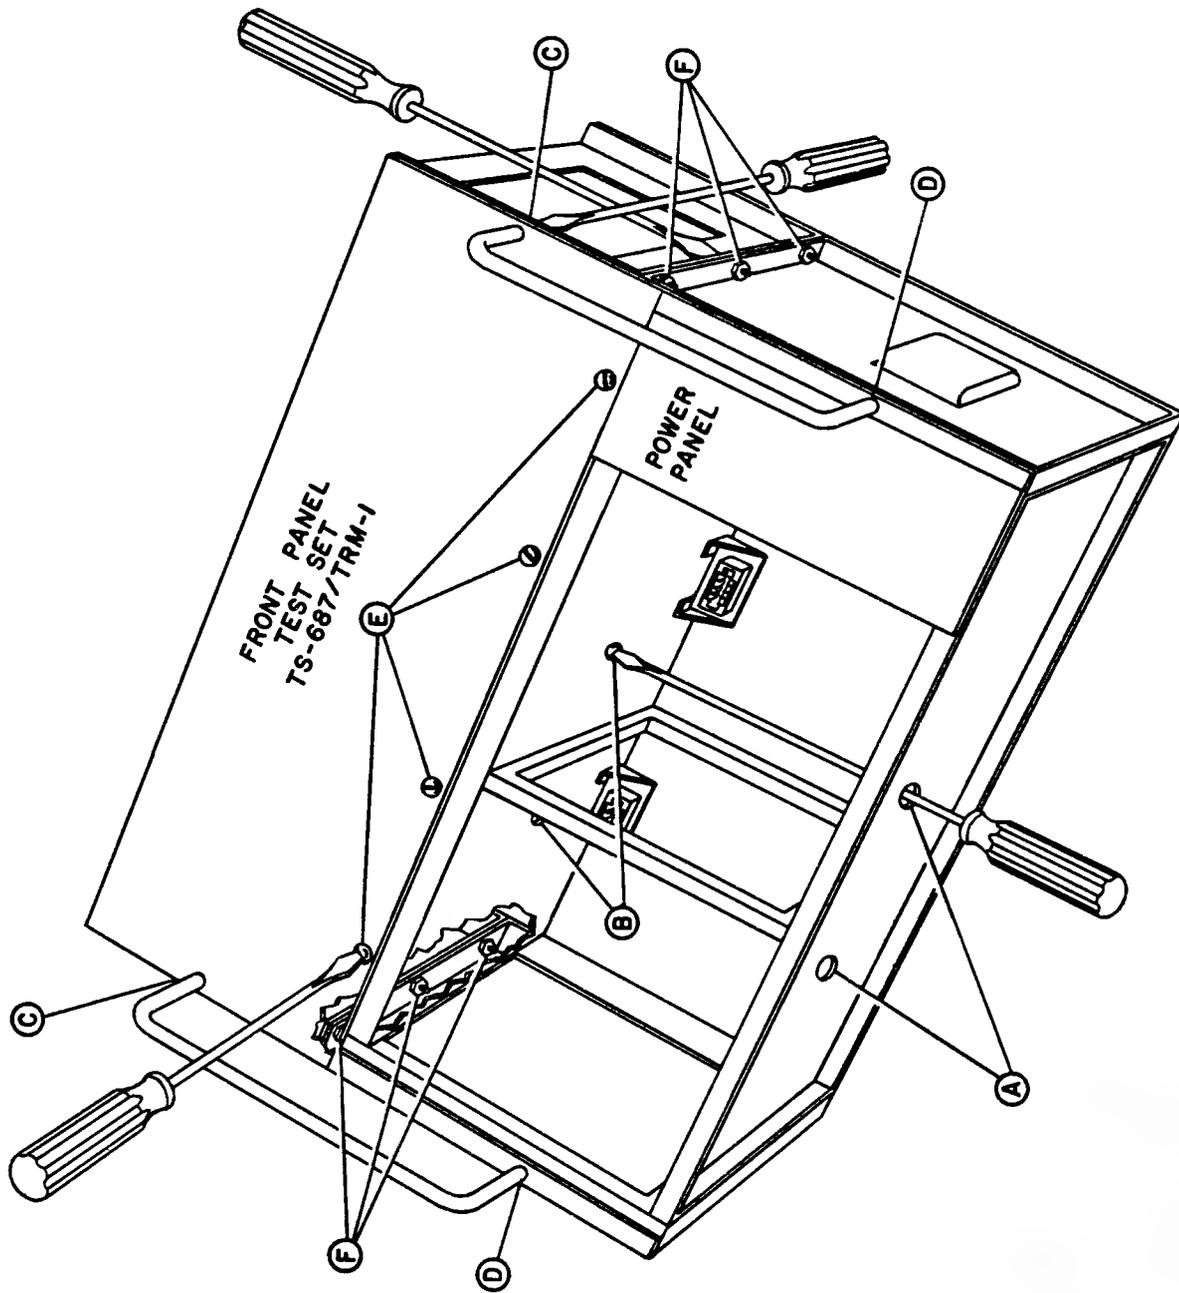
Disassembly for Test Set TS-687/TRM-1
